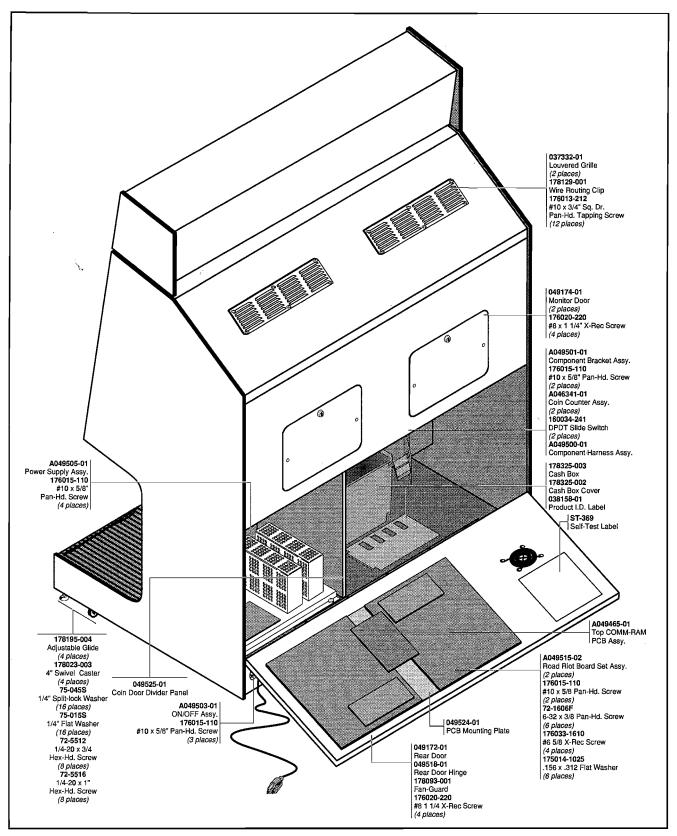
Cabinet-Mounted Assemblies, Rear View A049150-01 C
